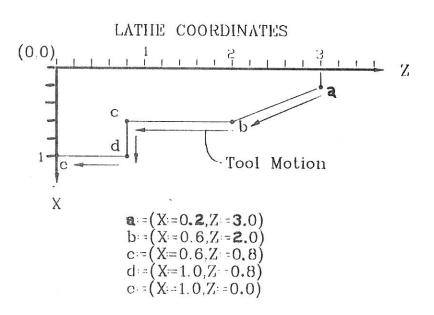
Two-Dimensional View Of Absolute Dimensioning Of Coordinate Points On A Workpiece
